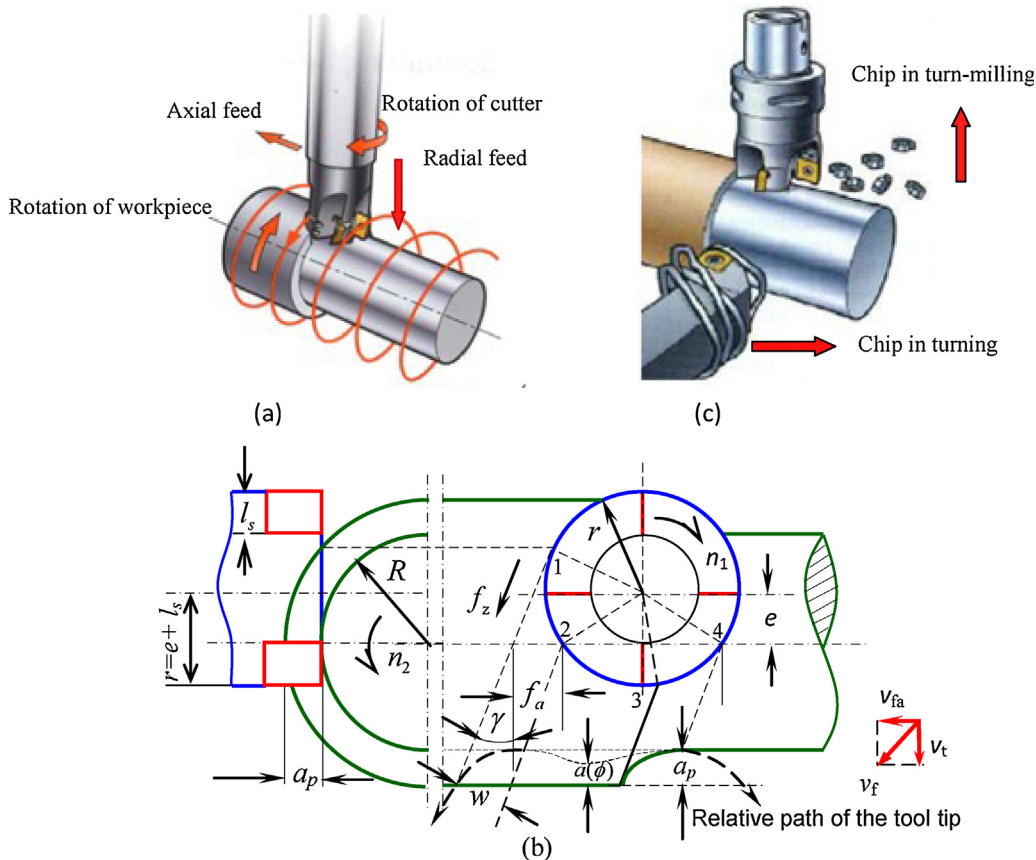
The machining kinematic principle in orthogonal turn-milling process.
